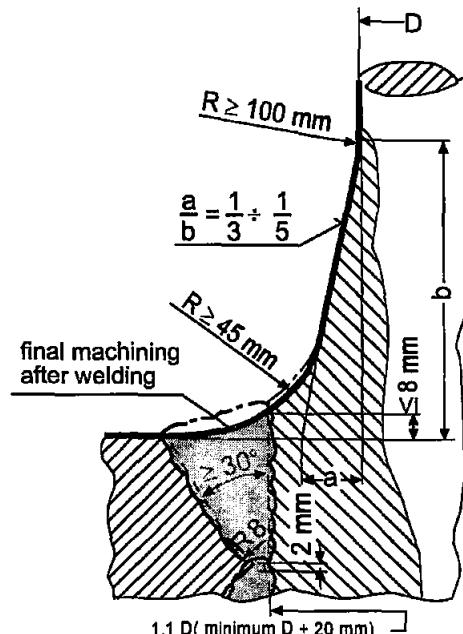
Welded joint between rudder stock and coupling flange
